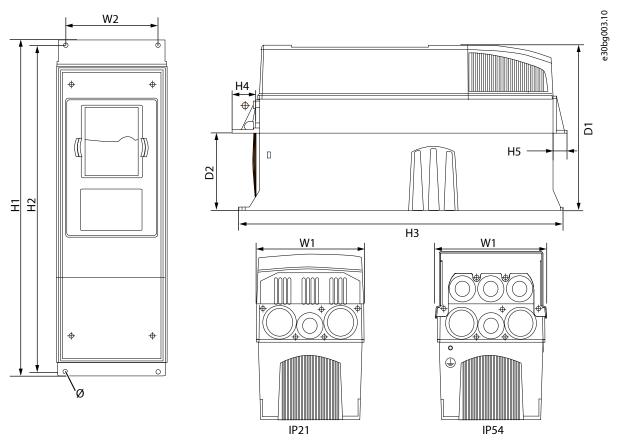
Dimensions of the VACON® NXS/NXP AC Drive with Flange, FR4-FR6
